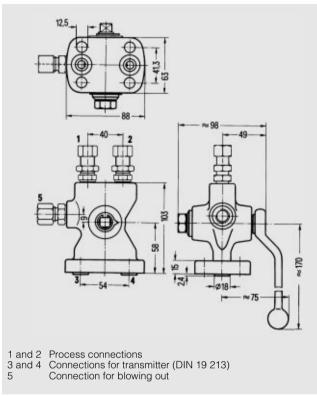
/56 Multiway cock for flanging to transmitter, dimensions
